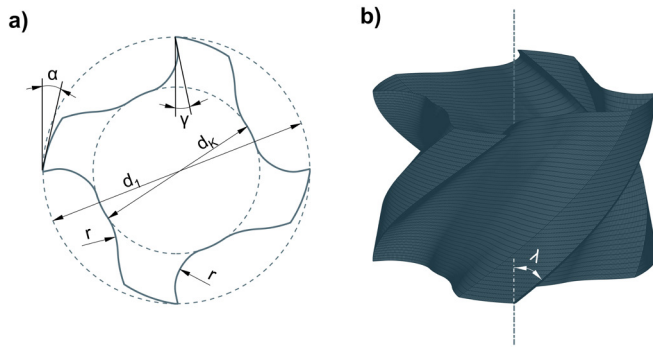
Workpiece geometry and parameters: cross section a) and 3D-triangulated surface b)
